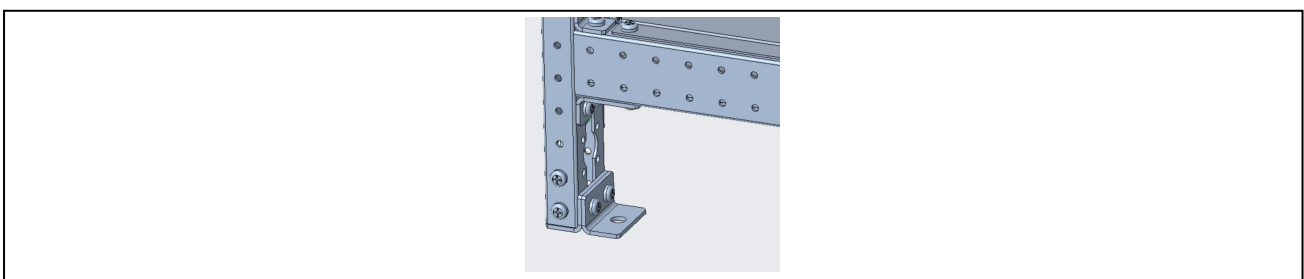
Side L-SHAPED Brackets configuration for core 2x/3x units
